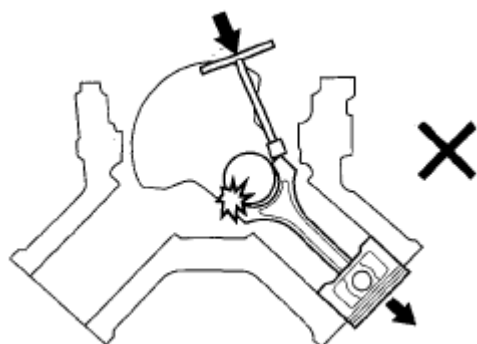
Identifying Incorrect Procedure Of Removing Piston/Connecting Rod Assembly
